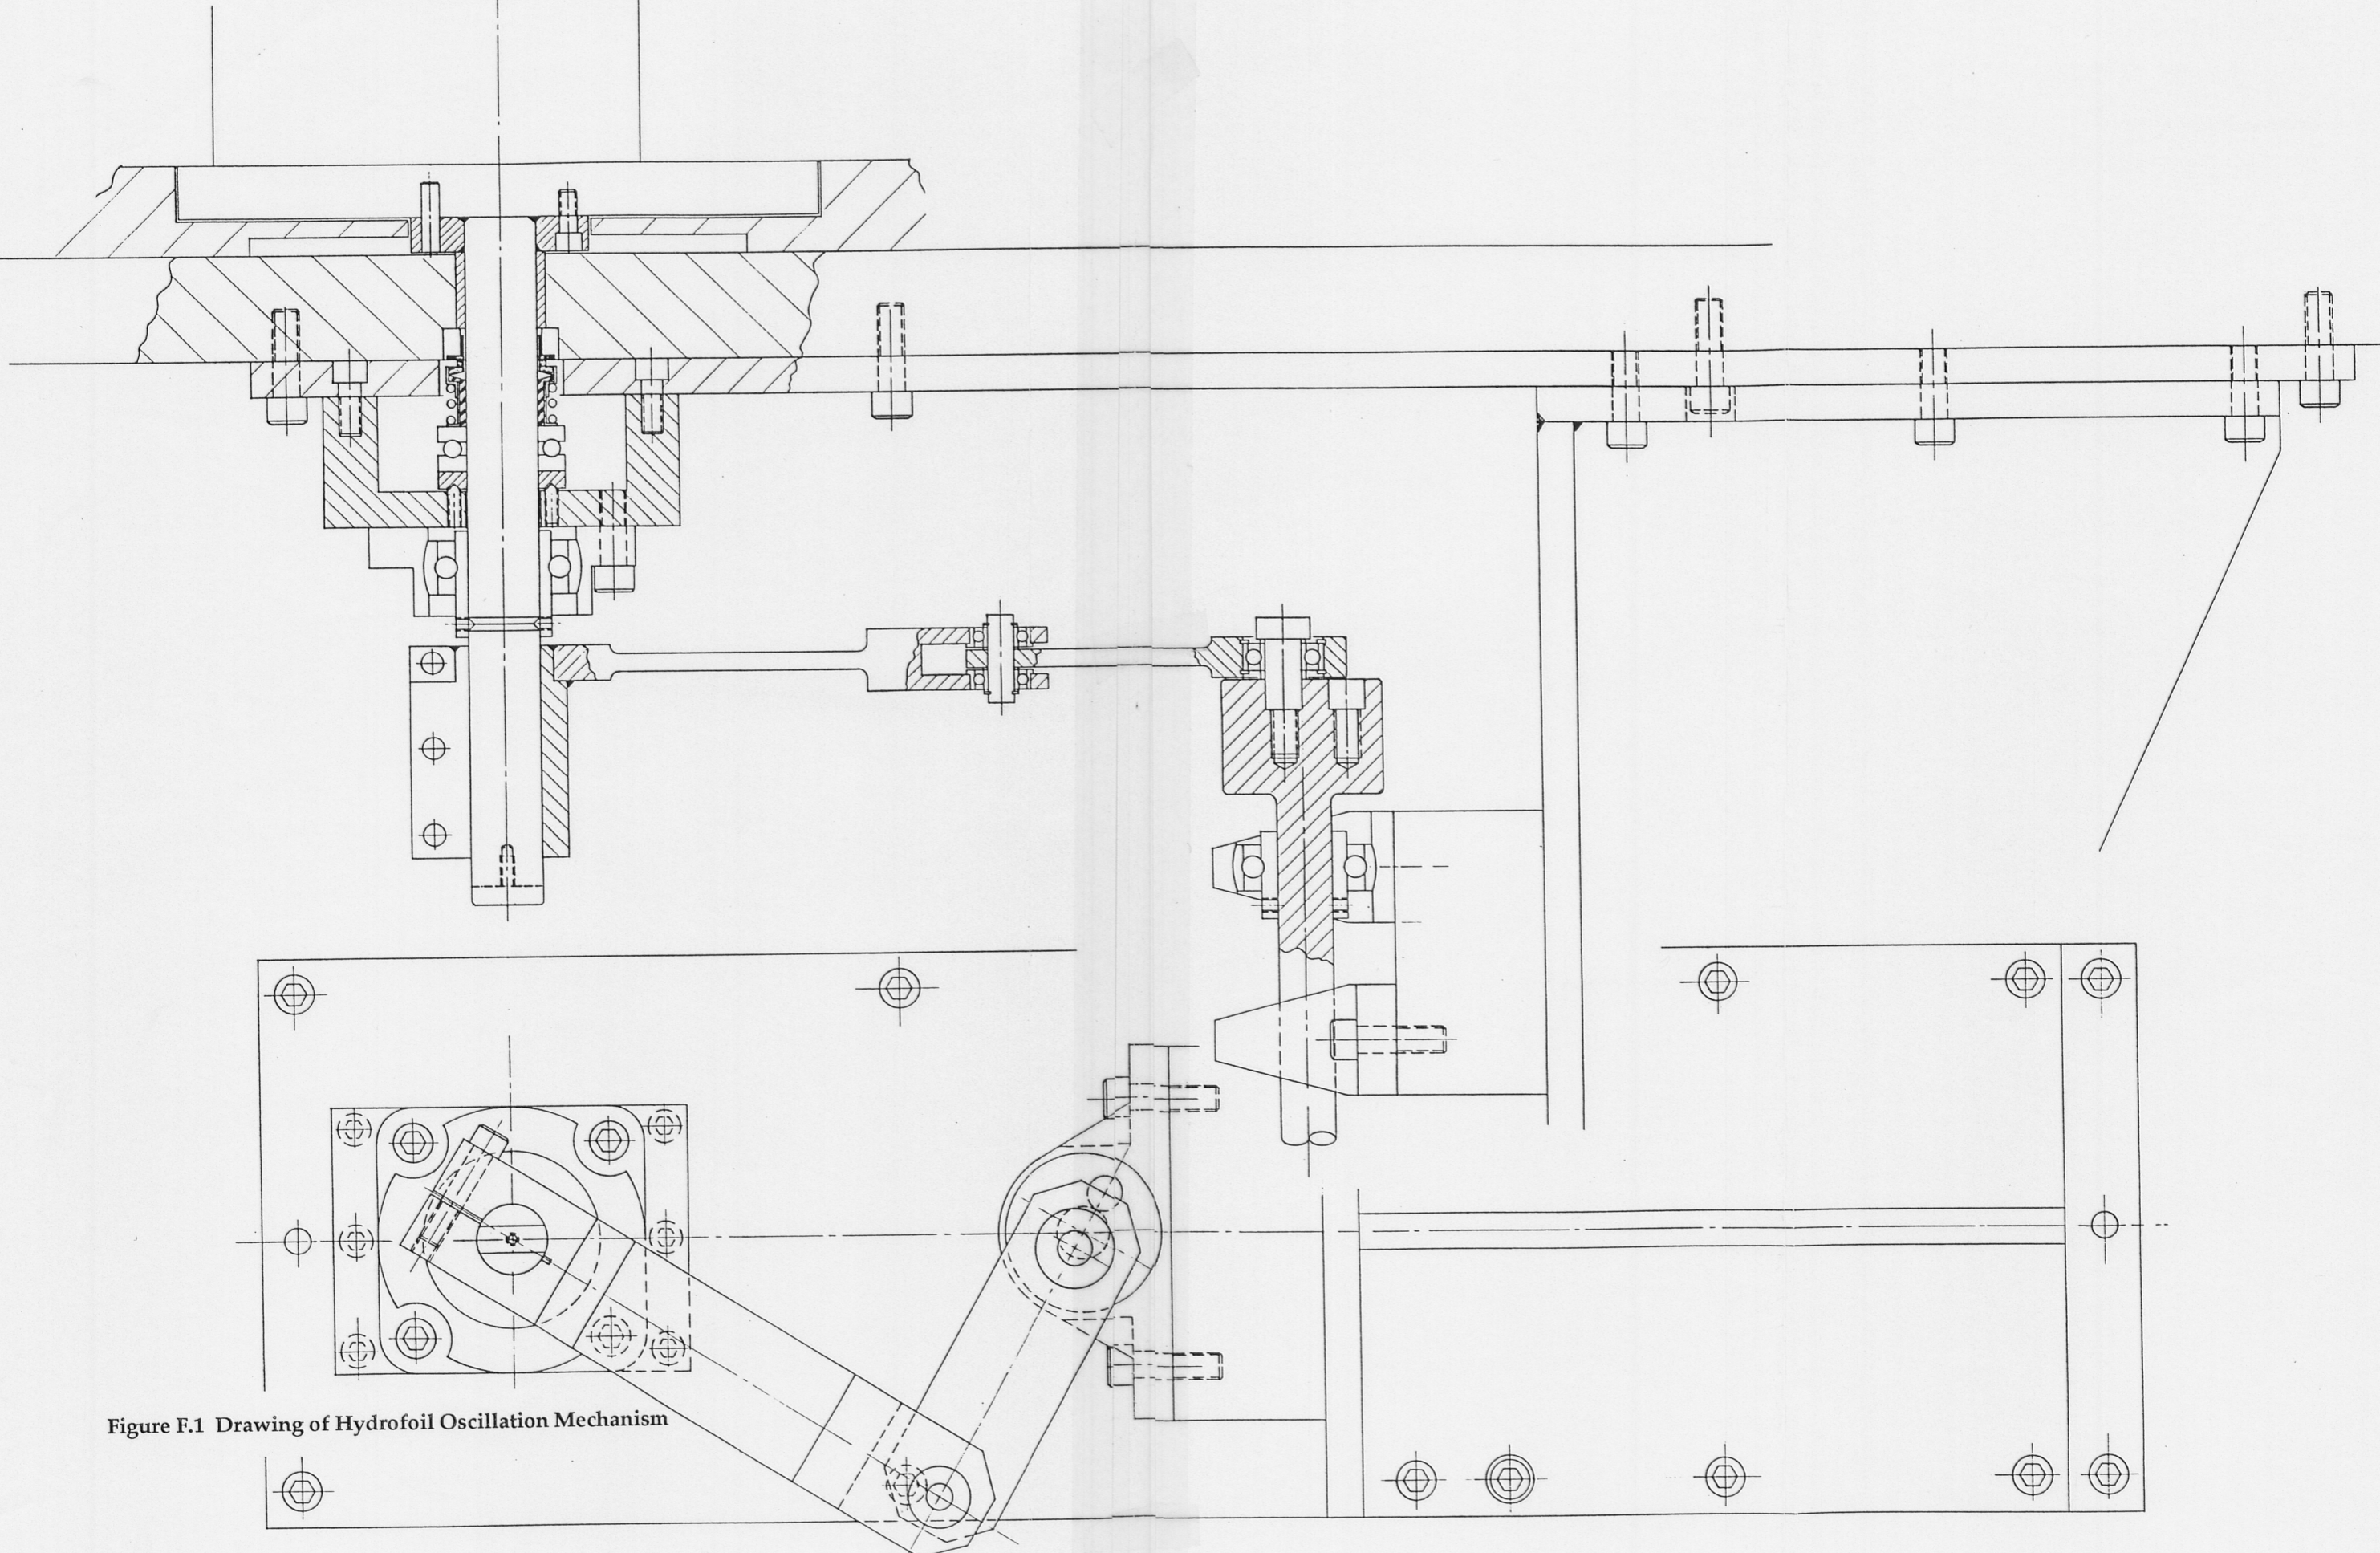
Drawing of Hydrofoil Oscillation Mechanism
